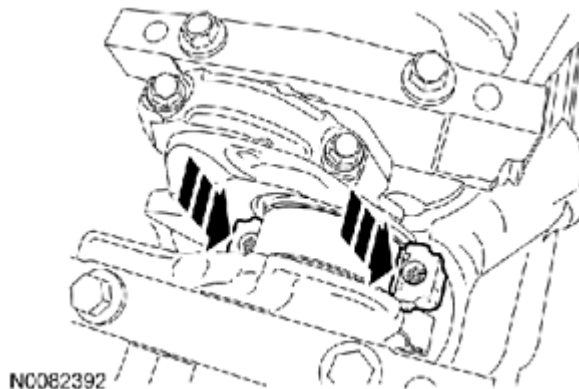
Locating Splash Shield, Pin-Type Retainer And Bolts
